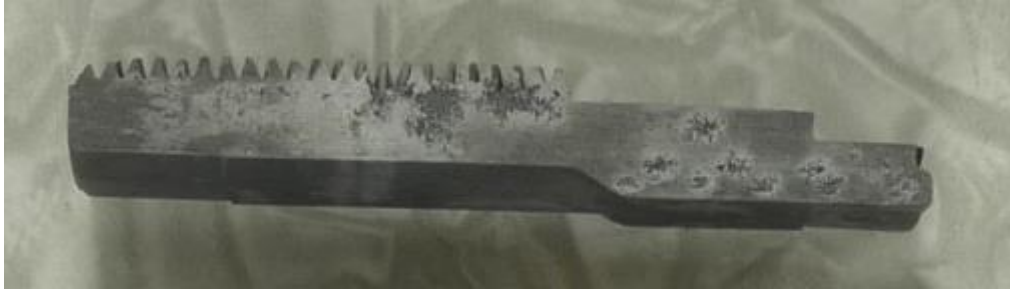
Pitting corrosion on machined surfaces of the corrosion sample after 19-month exposure to gas number 3.
